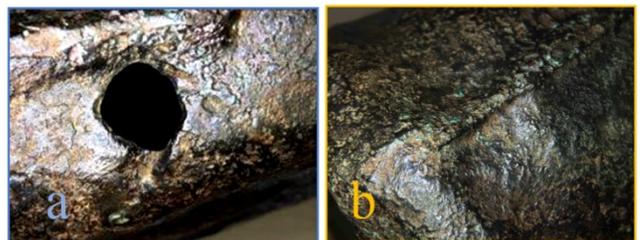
Axe (No. NG26) with casting defects: incomplete filling - misrun (a) and flashes along the line joining the mould – casting seam (b)
